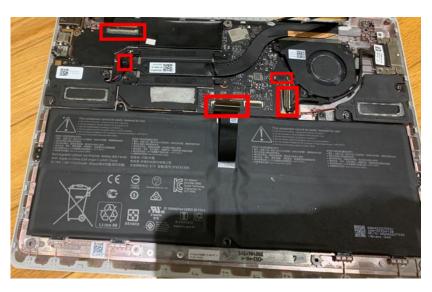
Surface Laptop Go with keyboard removed and components visible, as well as connections outlined in red and screws unscrewed
